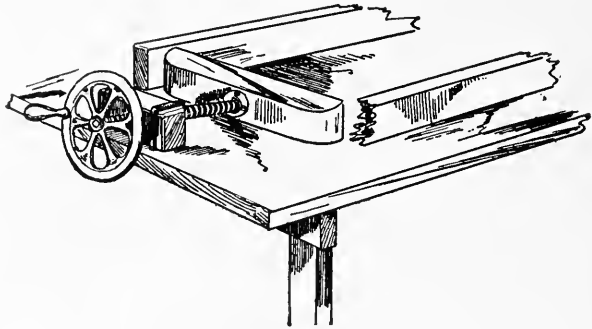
Wheel and Screw Apparatus for Making Frames.
